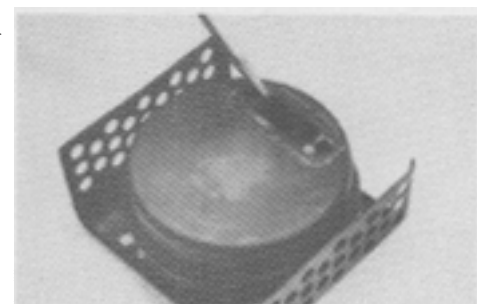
Check port area on muffler assembly for excess carbon deposits.
